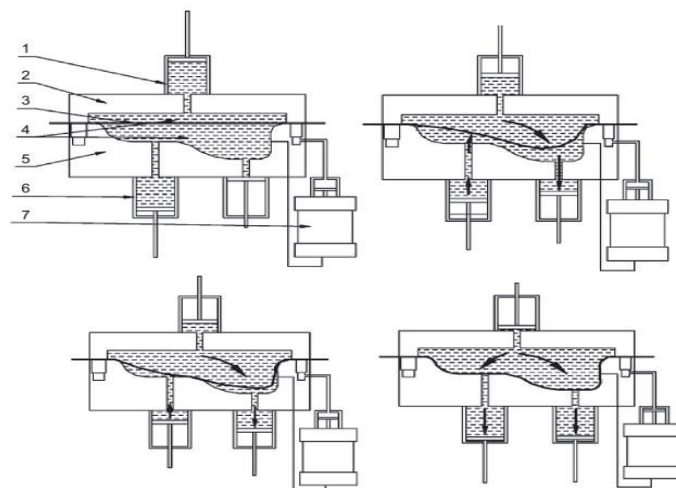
Figure for VPF [23]: (1) cylinder for injection (2) die used in upper side (3) sheet blank (4) viscous fluid (5) die (6) outer cylinder (7) cylinder holding blank.
